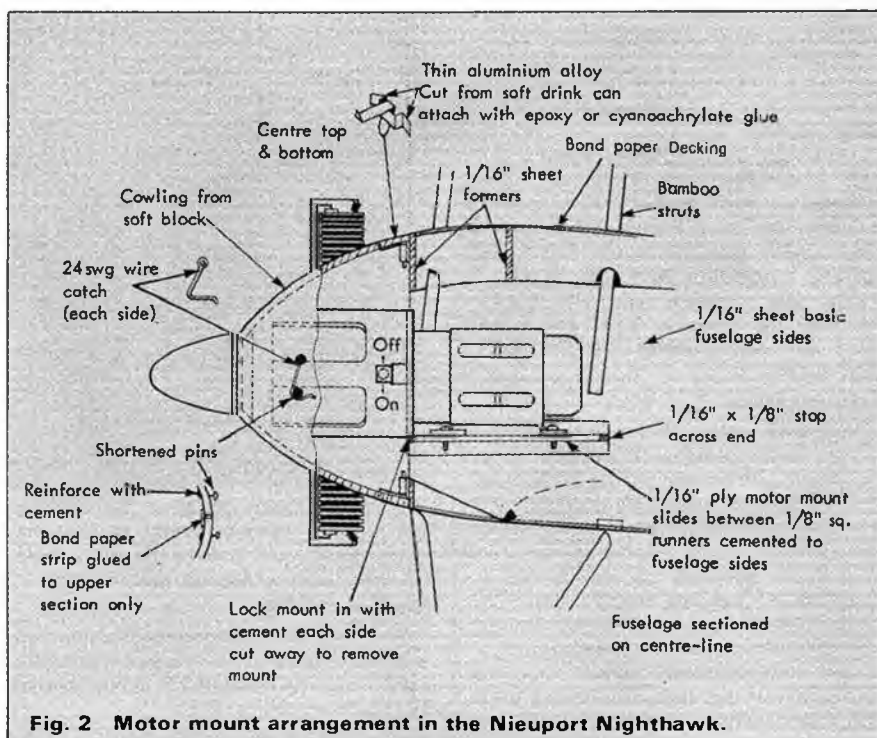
Motor mount arrangement in the Nieuport Nighthawk.
